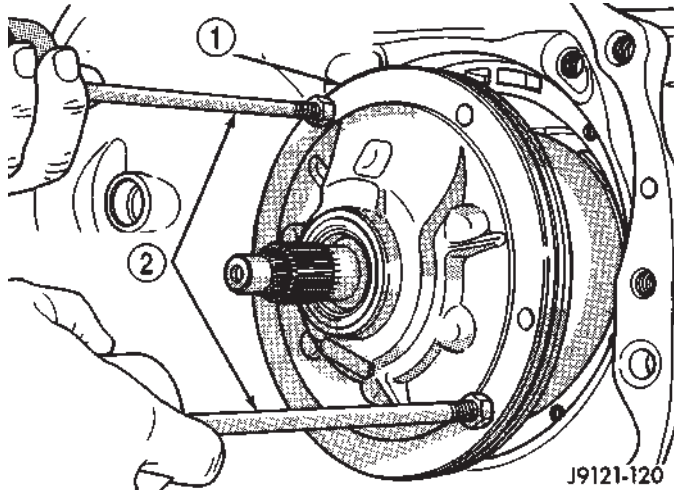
Removing Oil Pump And Reaction Shaft Support Assembly
